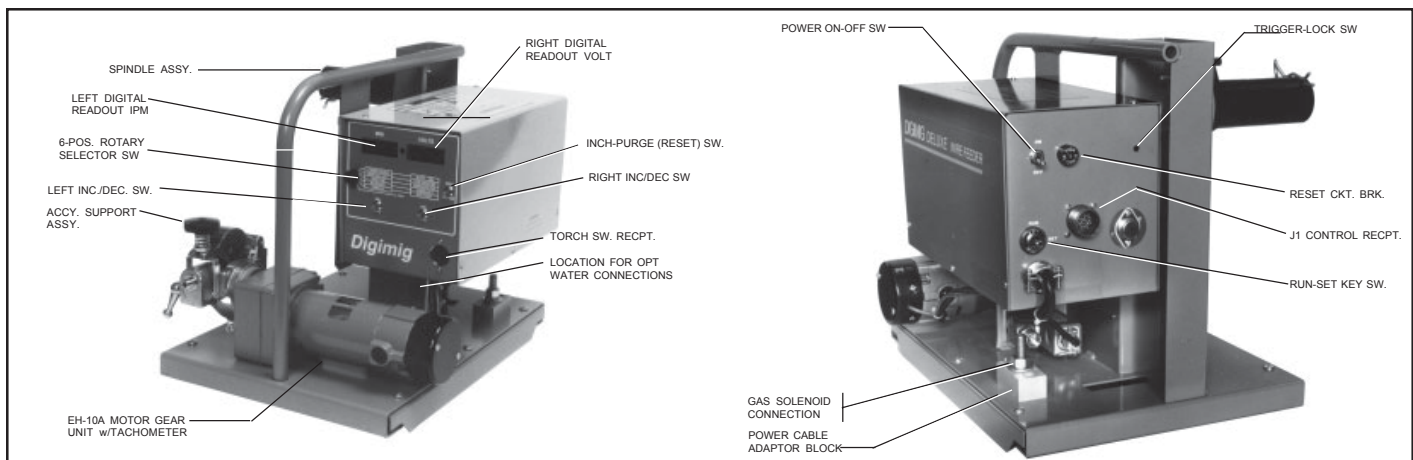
DIGIMIG Wire Feeder (front and rear view)
